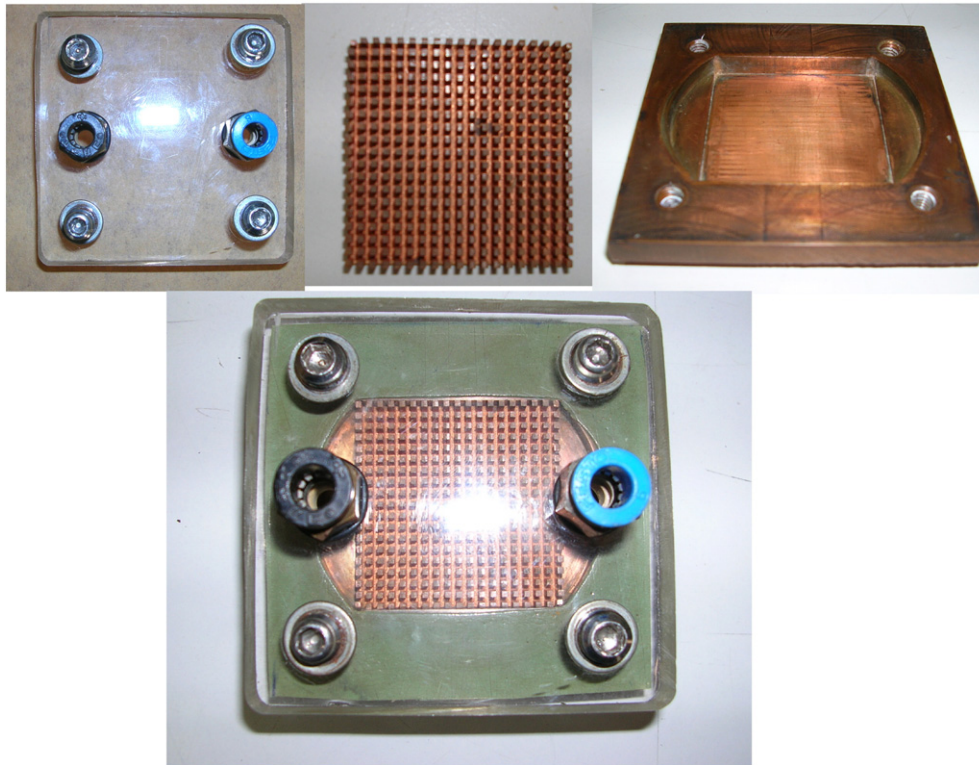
Photograph of the mini-rectangular fin heat sink components.
